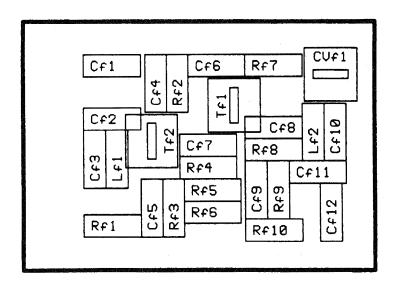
Auxiliary 100MHz VCO PCB Layout and Placement of Components
